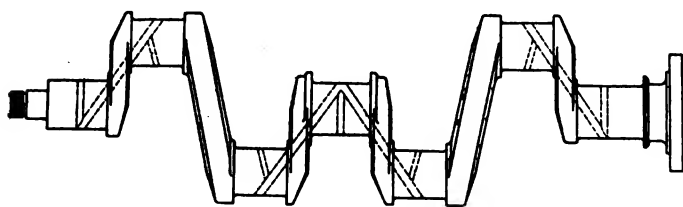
CRANKSHAFT IN WHICH OIL-HOLE LOCATION COULD BE CHANGED FOR THE EXPERIMENTS
